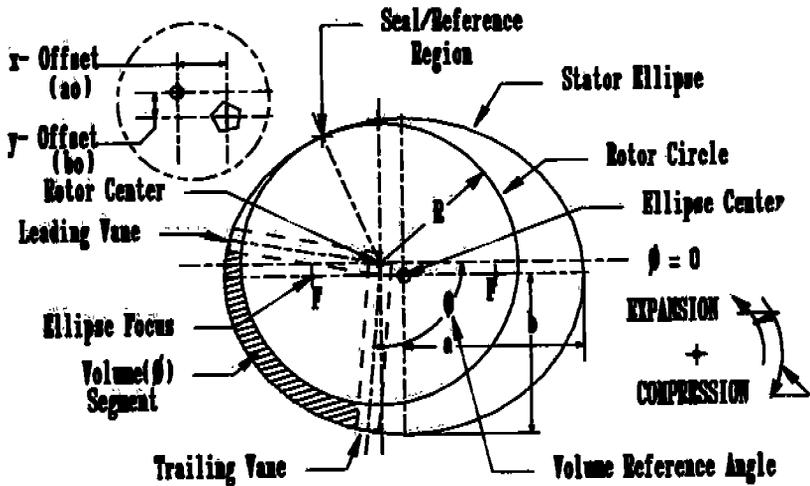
Stator/Rotor Geometry of the CRV Machine
